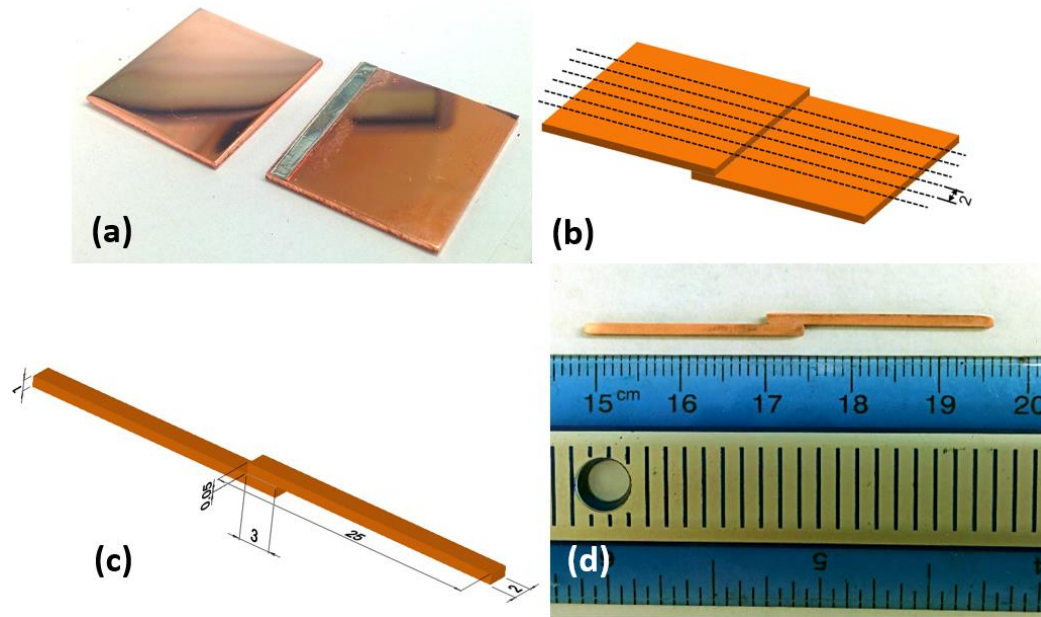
(a) Actual Cu coupon with solder foil on one side, (b) Fabricated specimens were stripped using wire EDM, (c) the dimensions and (d) figure of actual sample for single lap-shear test.
